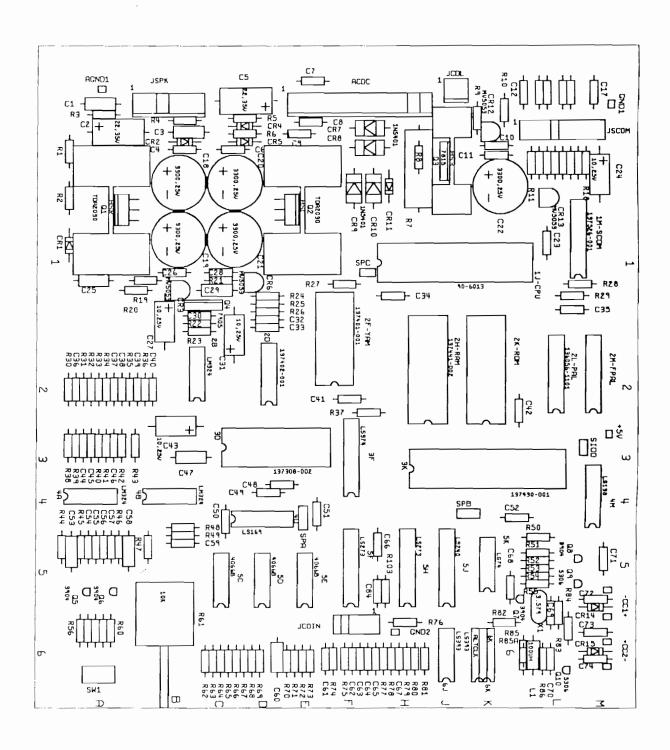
Stand-Alone Audio PCB Assembly A043713-23 A
